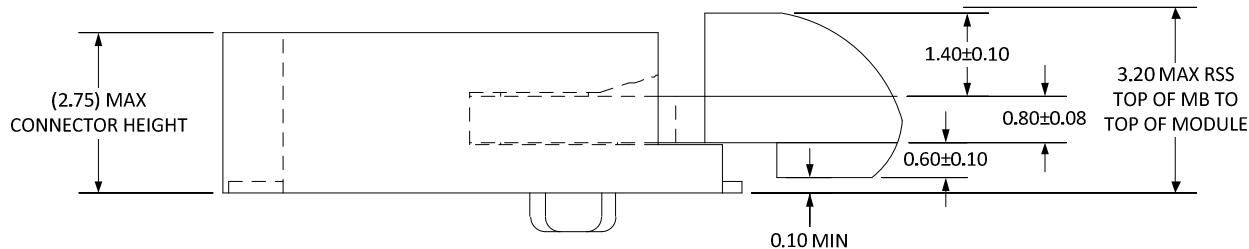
H2.8-D4 - Stack-up Top Mount Double-sided Module for 1.5 Maximum Top-side Component Height with 0.7 Maximum Bottom-side Component Height
